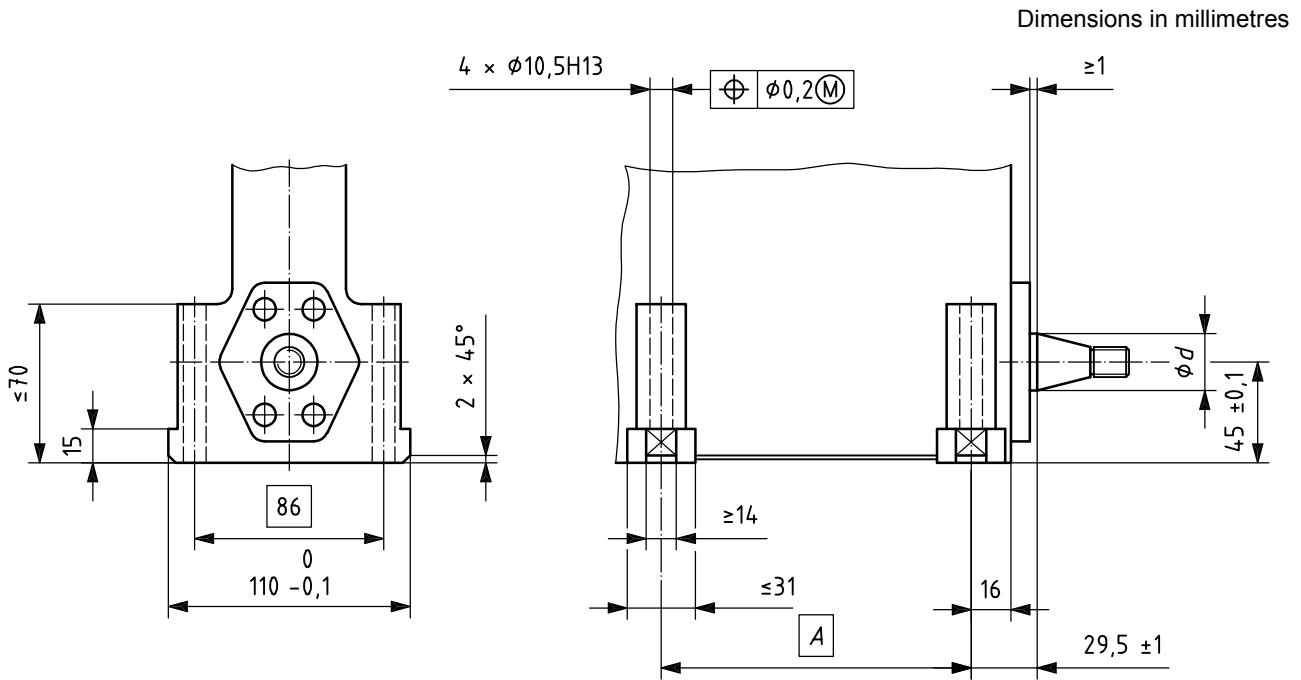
Base-mounted in-line fuel injection pump — Type 1
